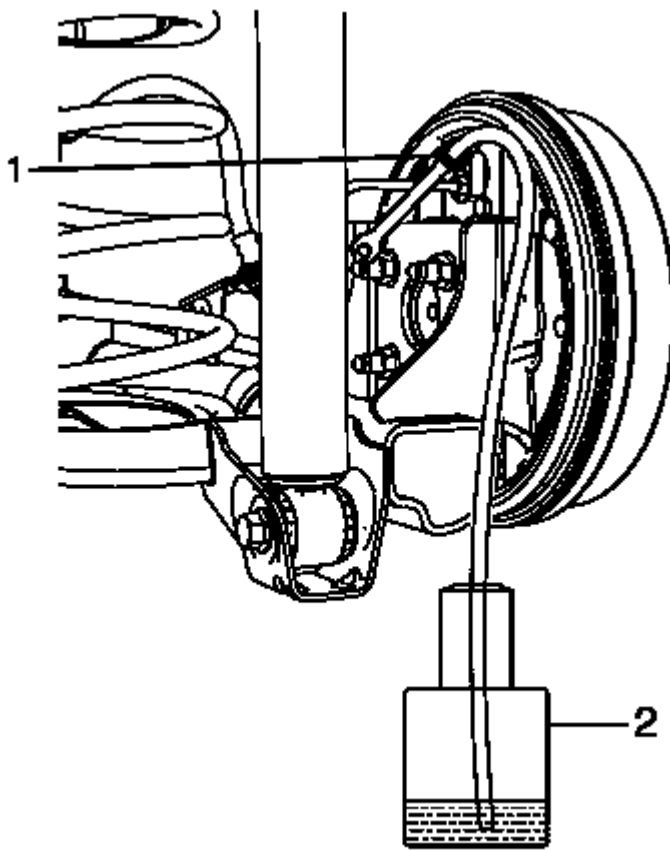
Wheel Hydraulic Circuit Bleeder Valve & Draining Container
